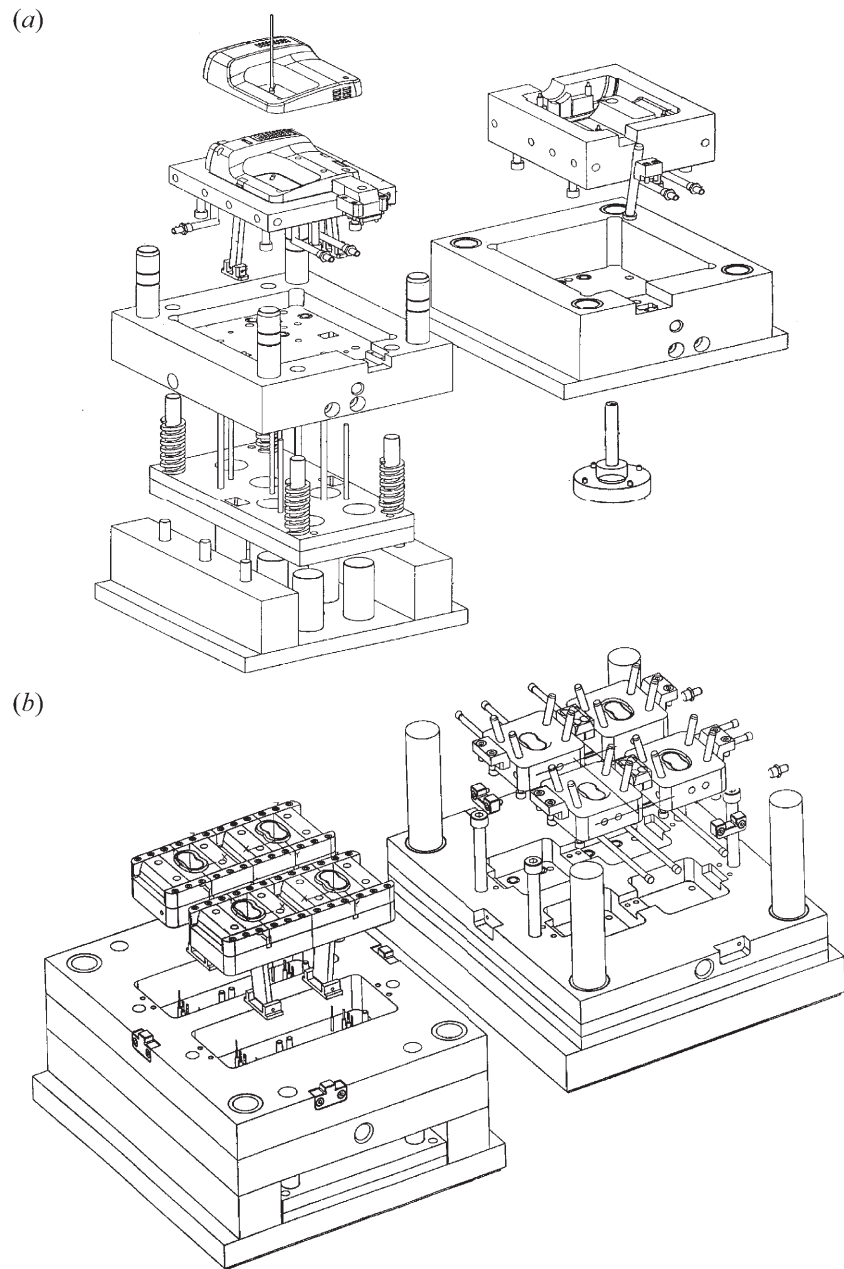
(a) A single cavity mould. (b) A multi-cavity mould.
